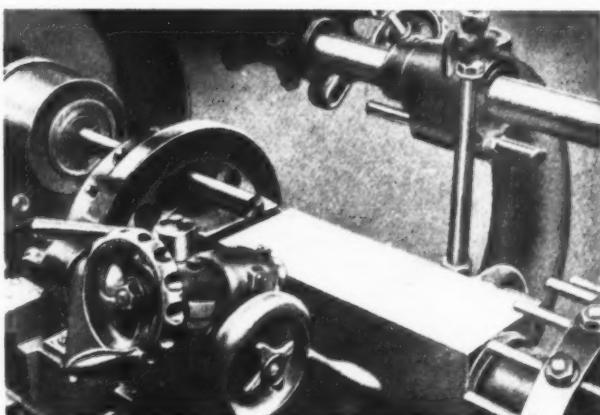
Elongated Hole in Tool-head Permits Machining and Cutting off Long Pieces
